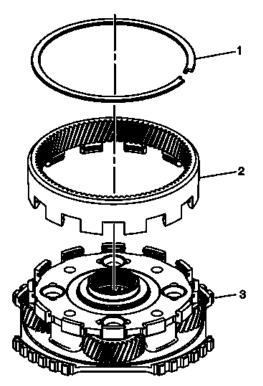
Identifying Low & Reverse Clutch Plate Courtesy of GENERAL MOTORS COMPANY
